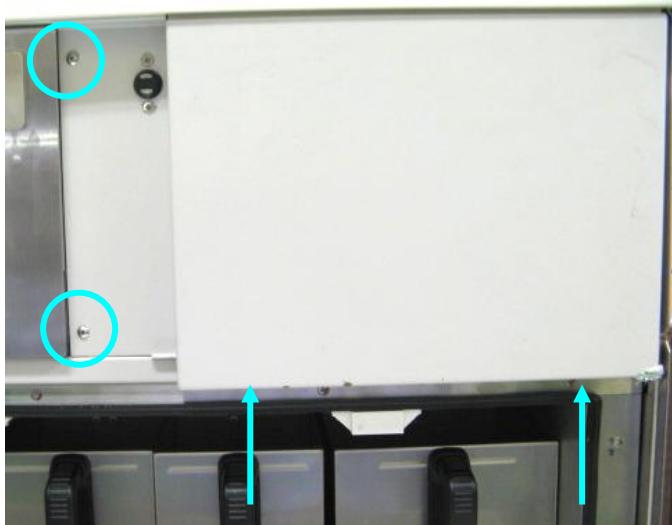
Removal of Front Panel and Screw Positions
